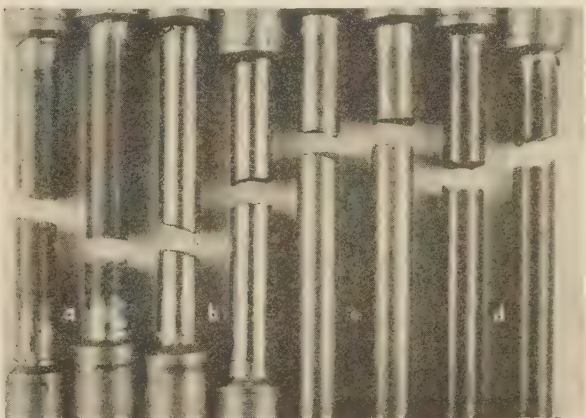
TYPICAL BENDING FATIGUE FRACTURES OF 0.225-IN. WIRE. (a) AS-RECEIVED CONDITION; (b) GROUND TO 0.221 IN. DIAMETER; (c) SHOT-BLASTED CONDITION; (d) SHOT-BLASTED AND BLUED CONDITION
